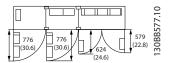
Space in front of IP21/IP54 enclosure type, frame size F13
